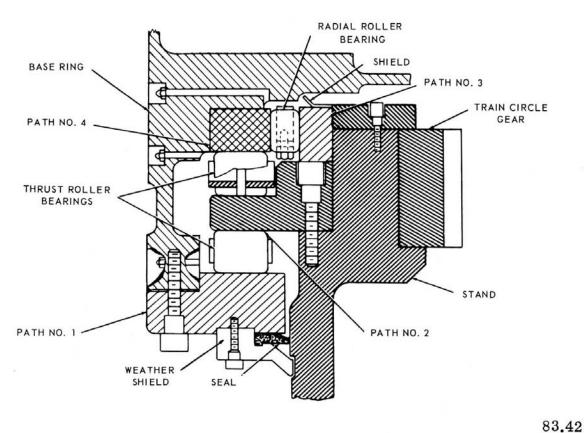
Sectional view of train bearing assembly (launcher stand).
